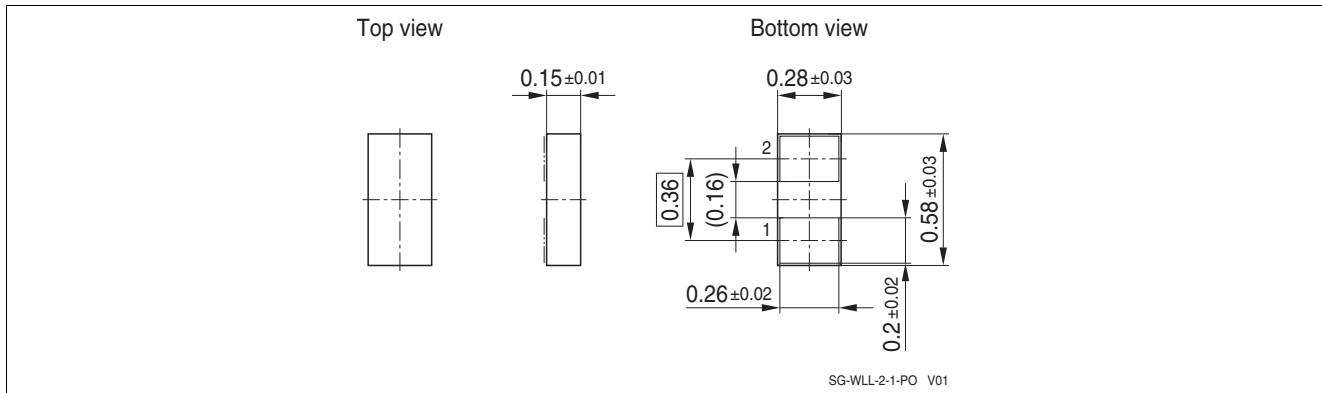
WLL-2-1 Package outline (dimension in mm)
